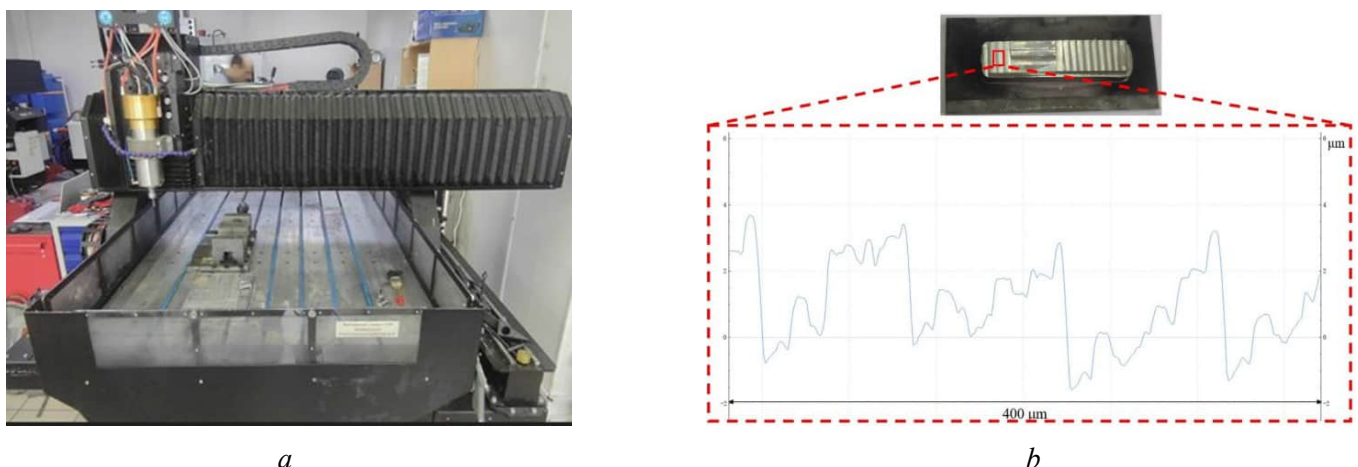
The *RM0813-01S2 CNC* machine (a); an example of the surface profile after milling (b)
